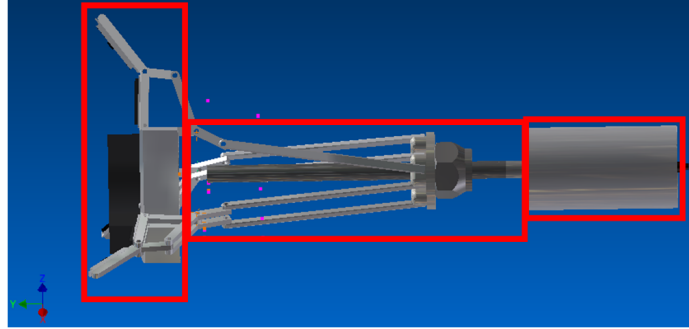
Mechanical components constituting the gripper. From left to right: grasping mechanism, ball screw mechanism, motor+gear box [41].
